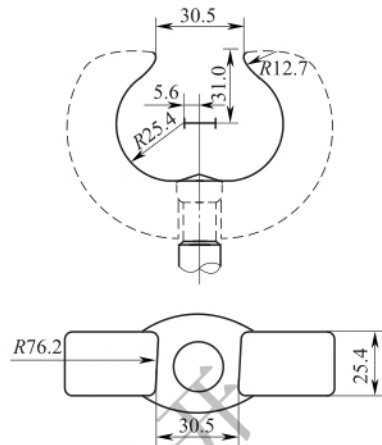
Fixture for tensile strength of "8" shaped specimen
